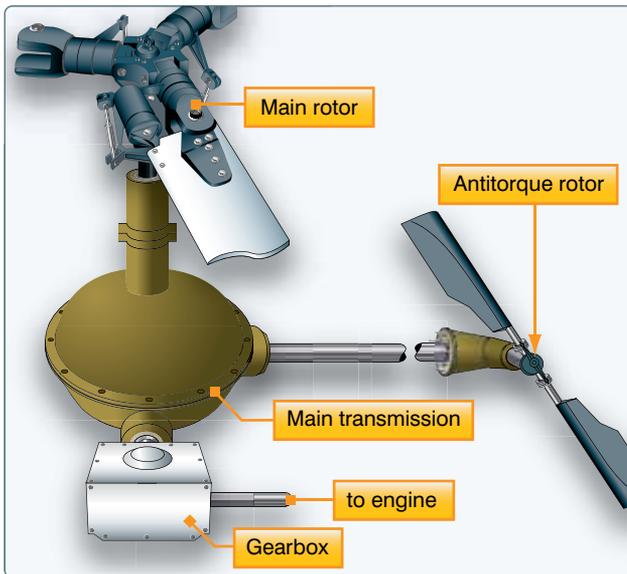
The main rotor transmission and gearbox reduce engine output rpm to optimum rotor rpm and change the axis of rotation of the engine output shaft to the vertical axis for the rotor shaft.
